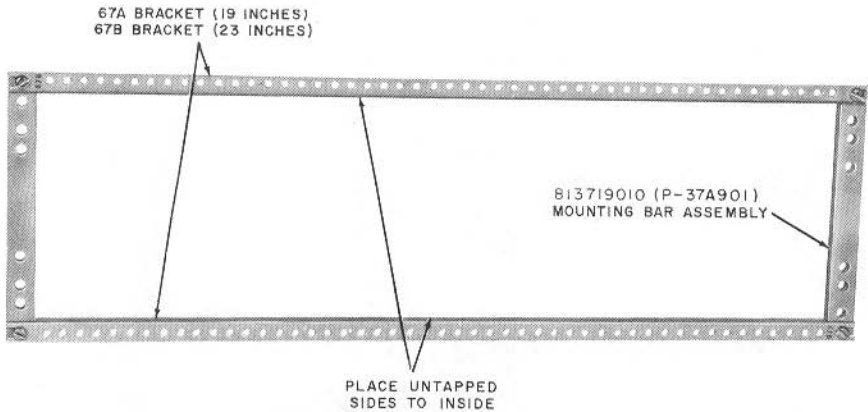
67-Type Brackets for Mounting Panel Type 200-Series Key Telephone Units
